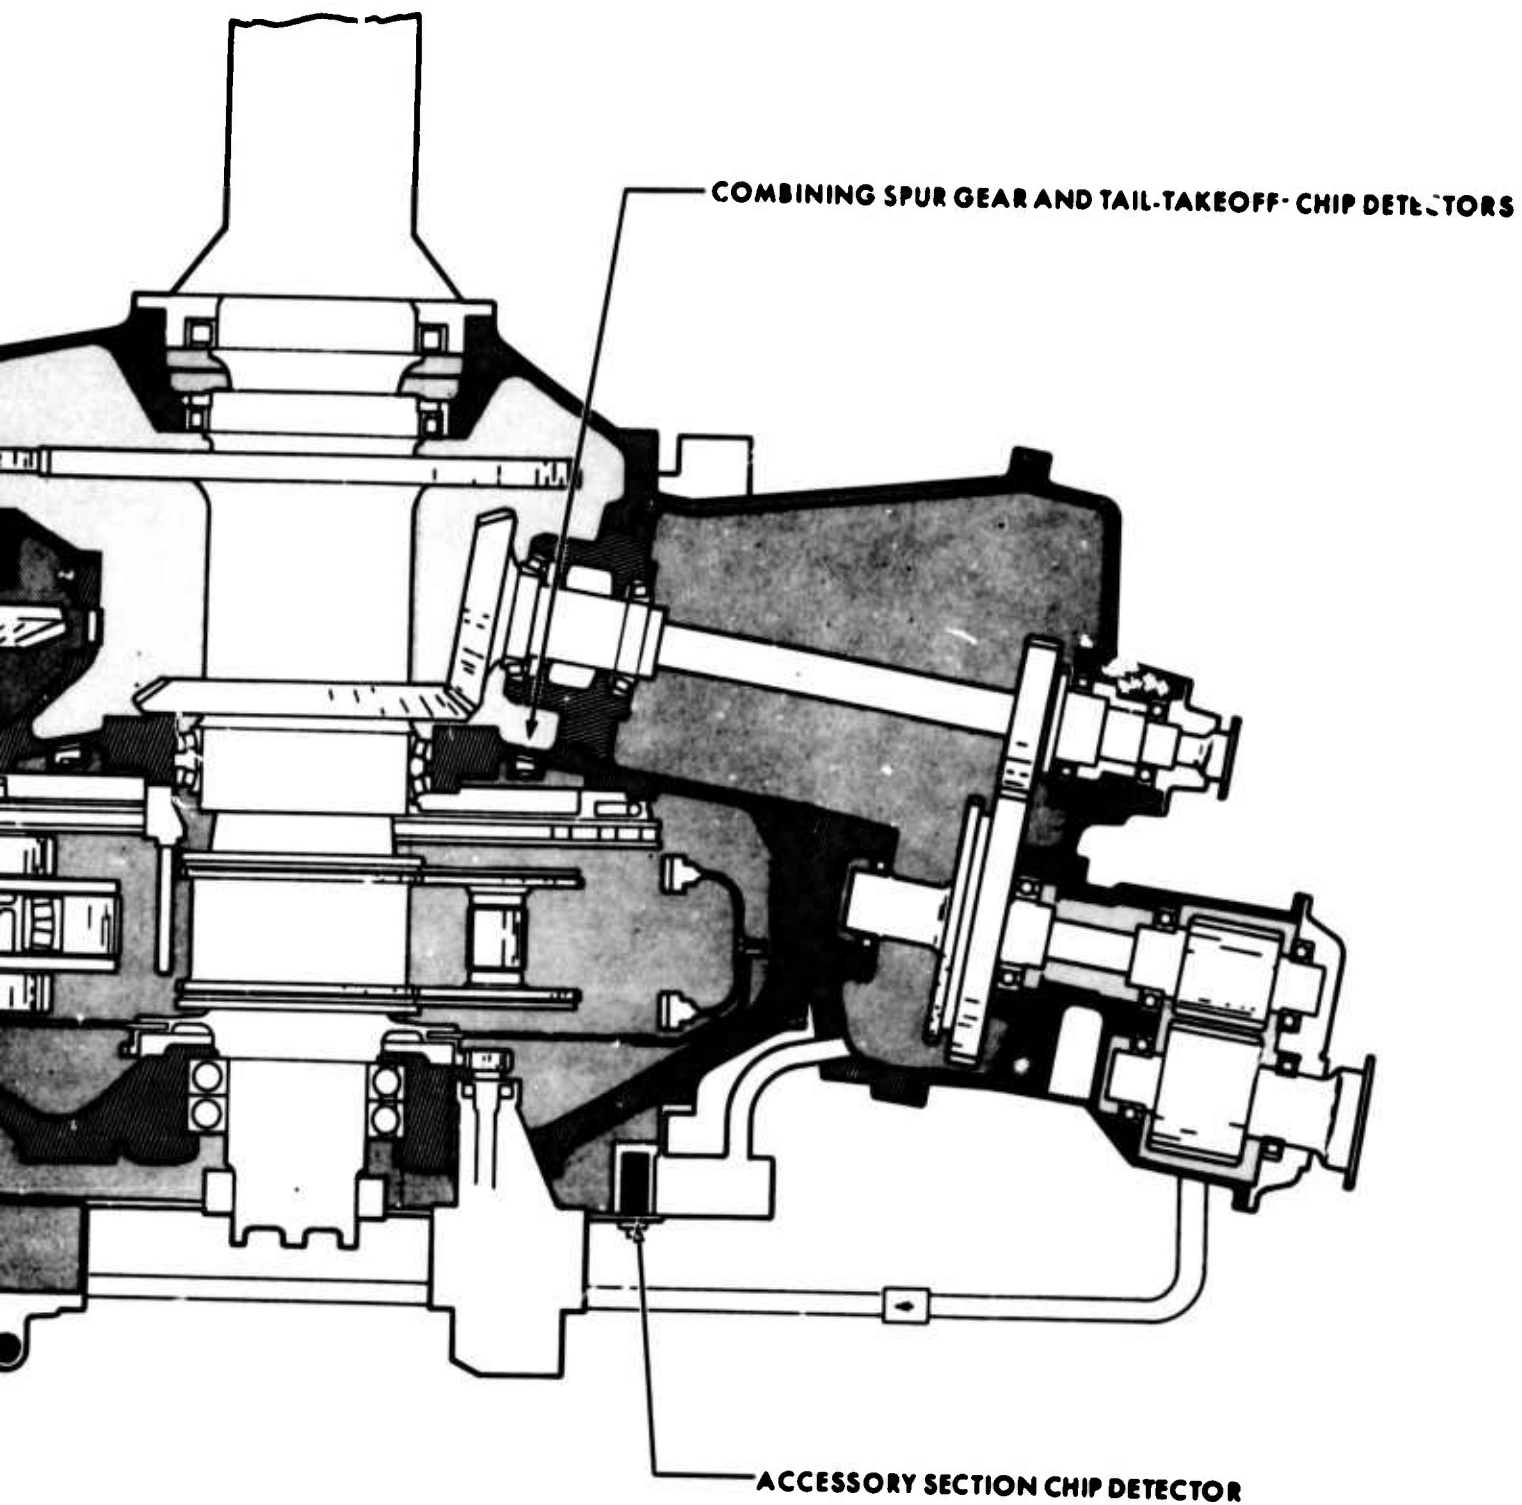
Oil Drainage - Ring Gear/Lower Housing.
